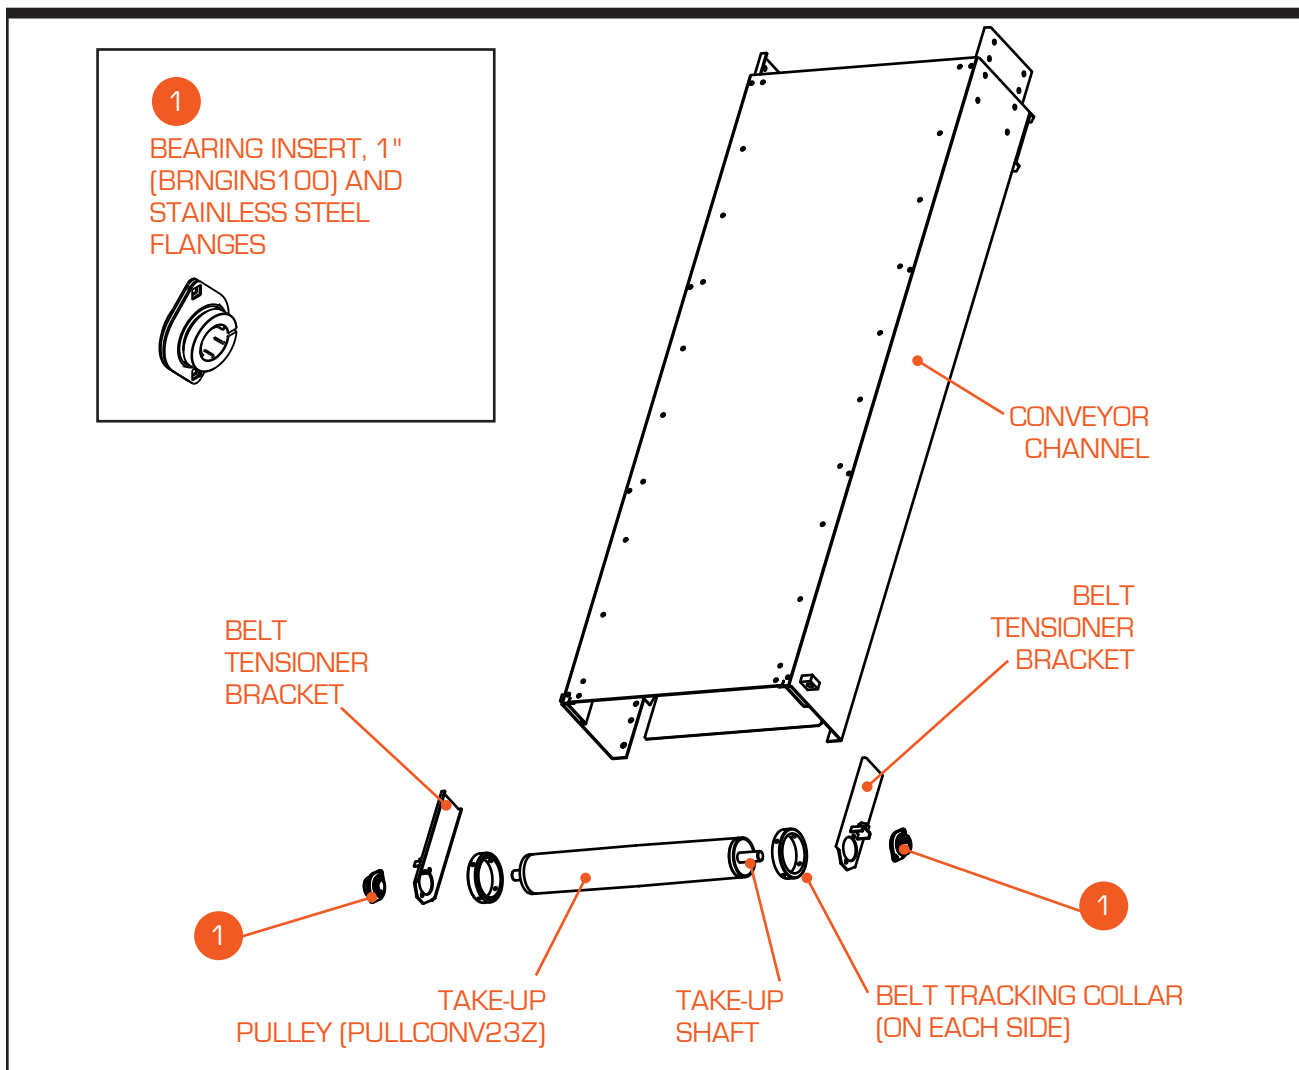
Lower Take-Up Pulley on Elevator - Sub-Assembly
